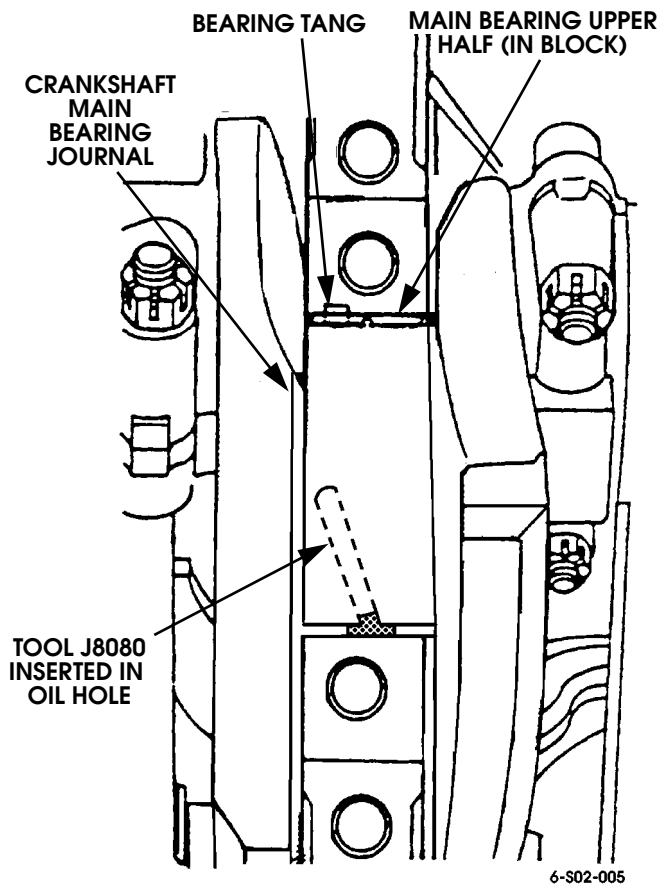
Removing/Installing Main Bearing Upper Half with Cotter Pin or Equivalent
